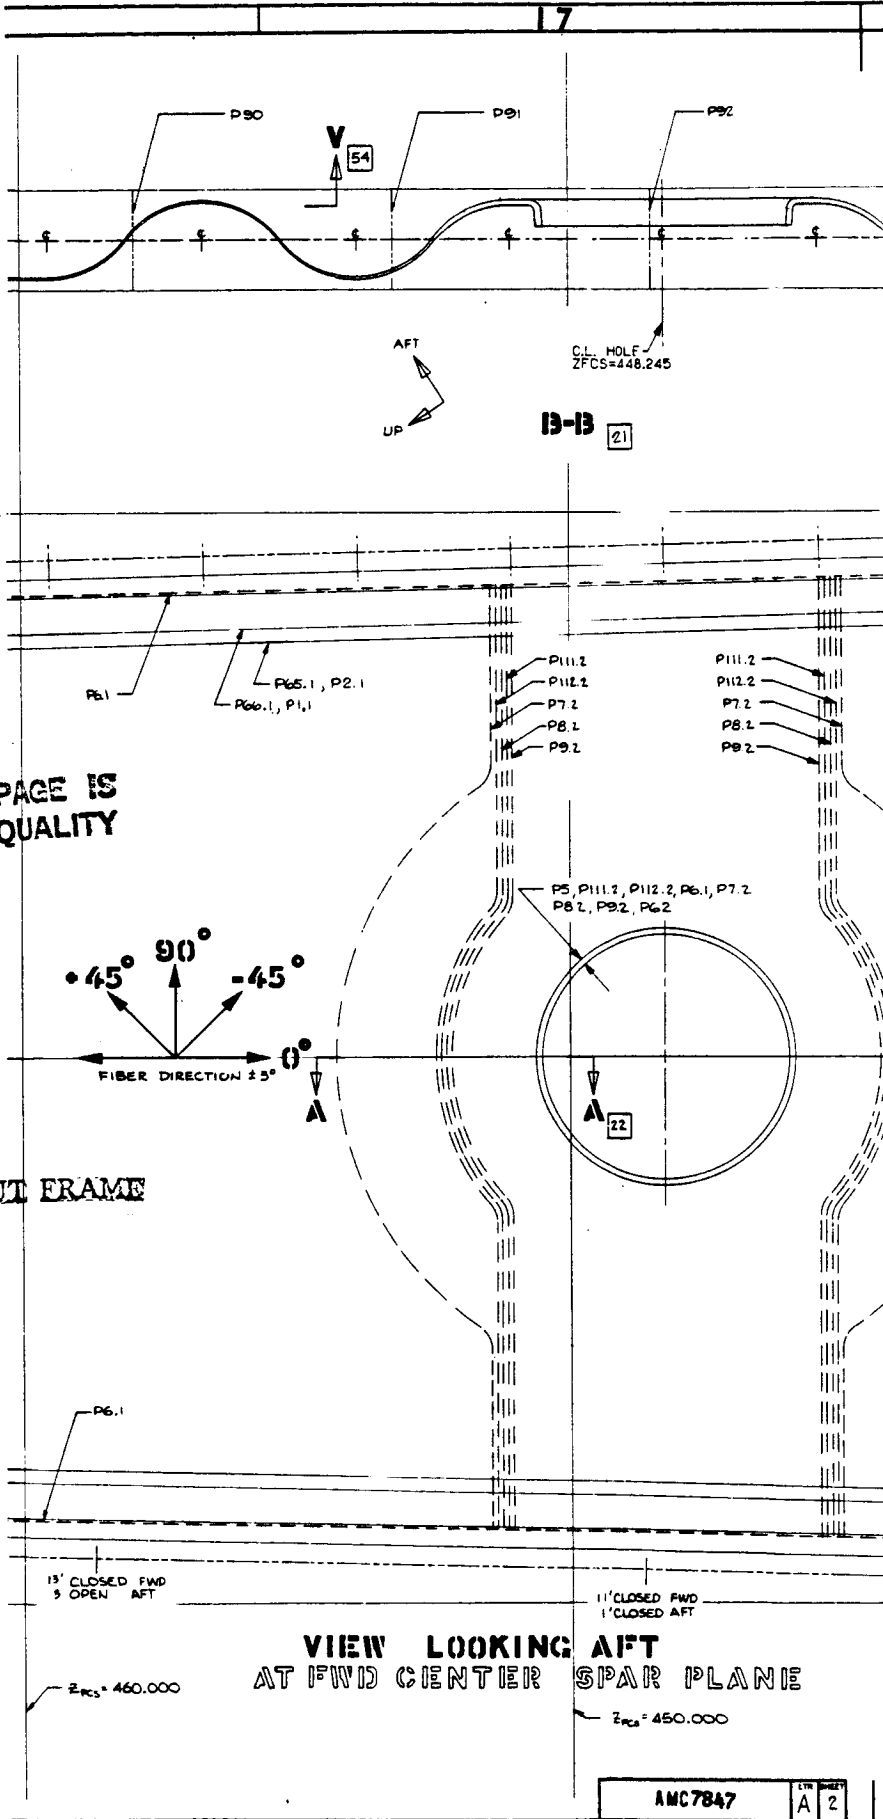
DRAWING AMC7847 - FORWARD CENTER SPAR ASSEMBLY
